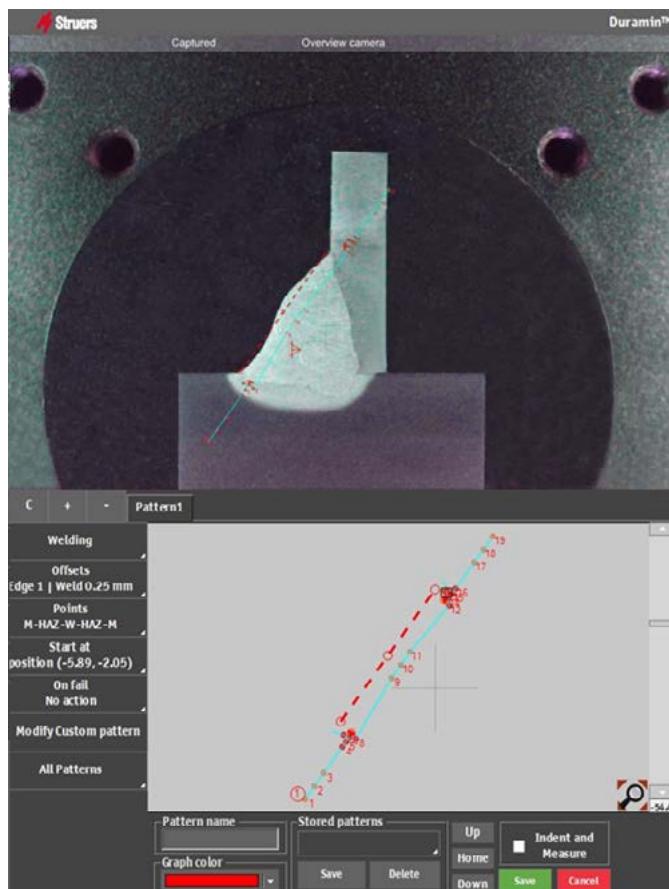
Placing of test points on weld with the help of an overview camera.
